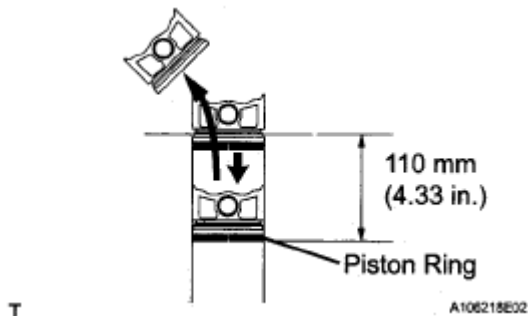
Inserting Piston Ring Into Cylinder Bore
